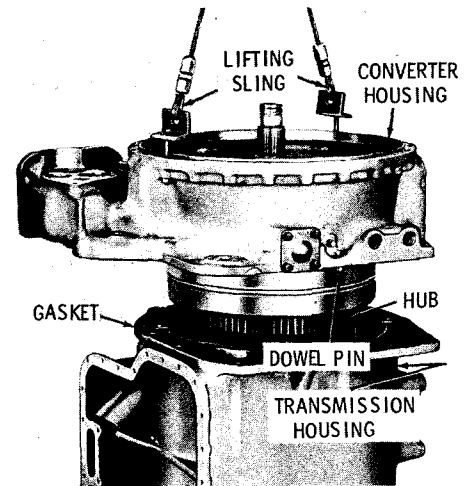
Installing converter housing onto transmission housing (CT, CLT, VCLT) S1715
